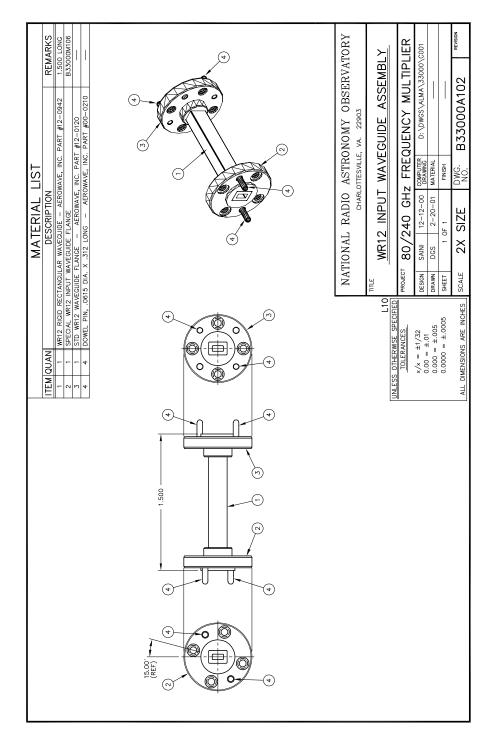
80/240 GHz frequency tripler, version 1 and 2: WR-12 input waveguide flange adapter assembly.
